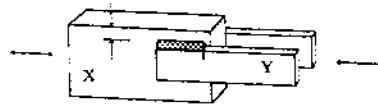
UKDEn Load Carrying Fillet and T Butt Weld 4
